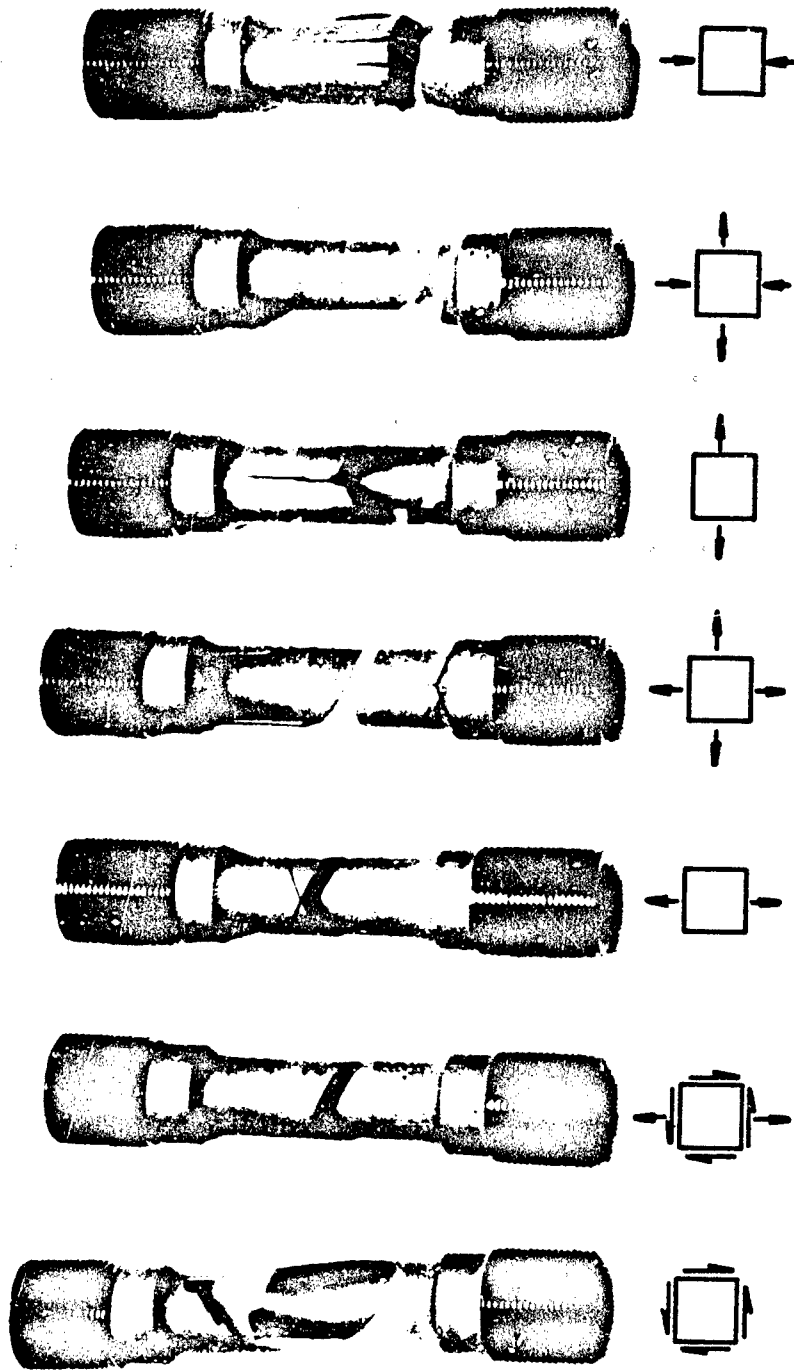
FRACTURE MODES FOR EXTRUDED BERYLLIUM SPECIMENS TESTED AT 70°F
